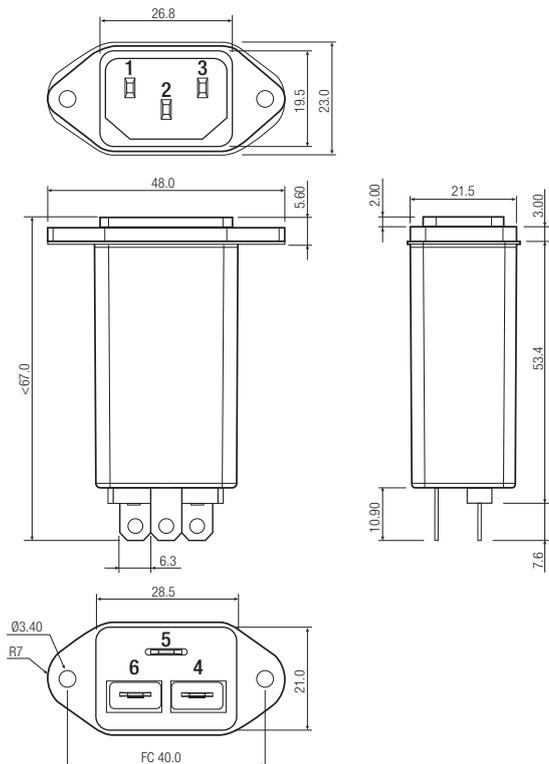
Mechanical Dimension / Mechanische Dimensionen
